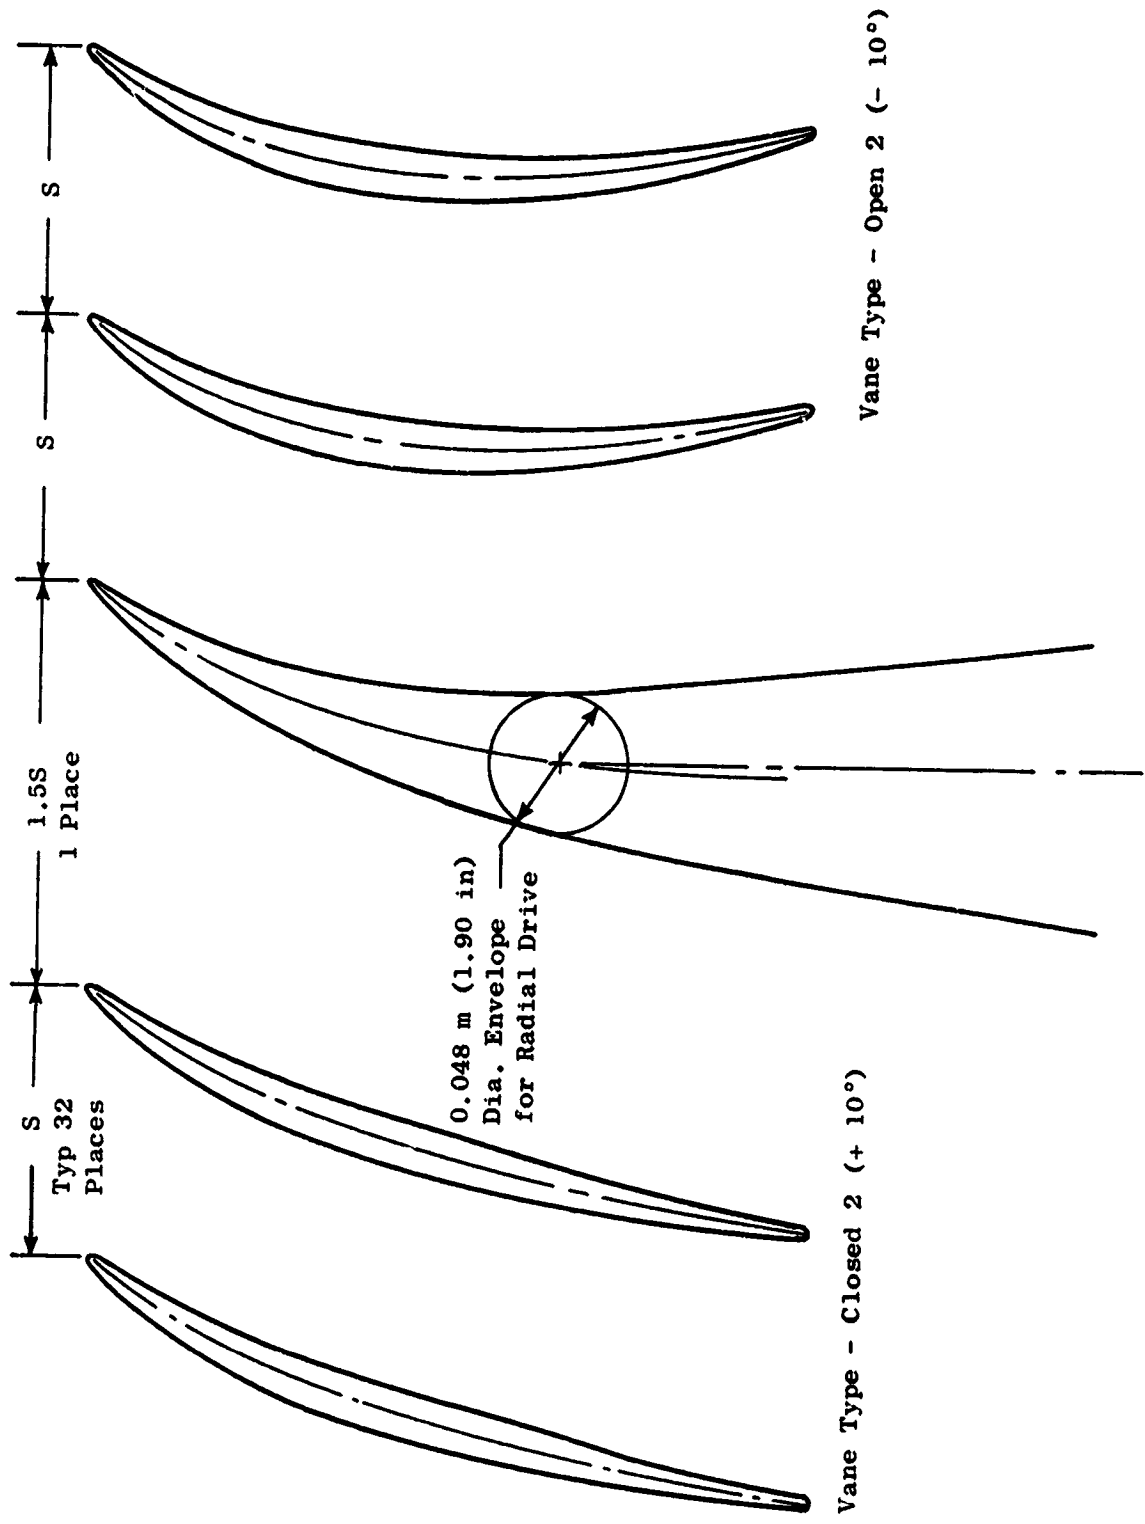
Vane Frame Unwrapped Section at I.D., 32 Vanes Plus Pylon L.E. Fairing.
